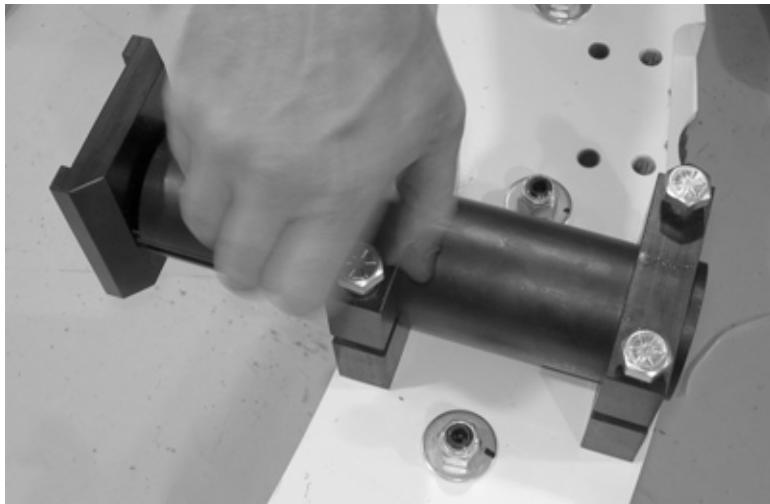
After positioning the leg, tighten the clamping block bolts to secure it.
